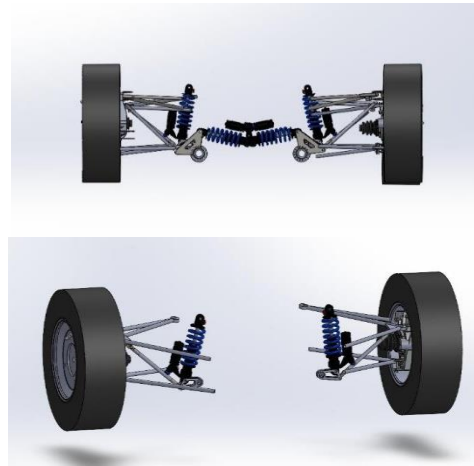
Complete CAD assembly of the pull-rod suspension system.
